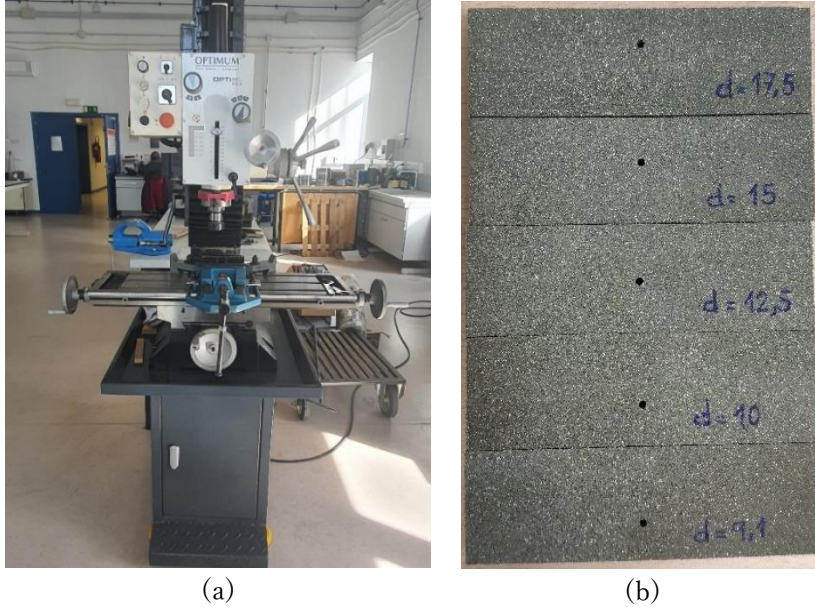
Preparation of notched samples (a) milling machine used for the drilling of notched samples, and (b) notched samples with a hole.
